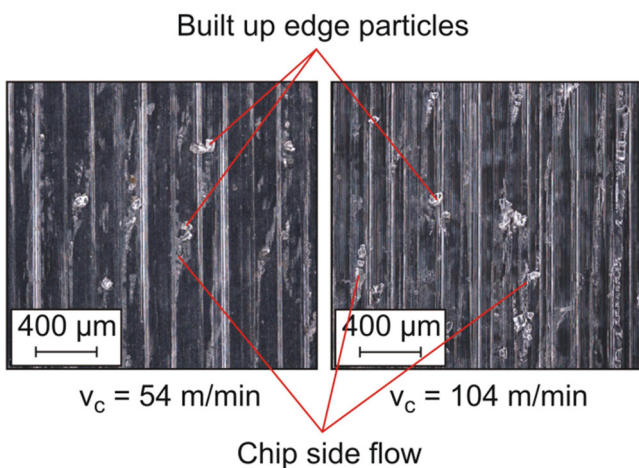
Surface obtained after turning with $f = 0.1 \text{ mm/rev}$, $a_p = 0.5 \text{ mm}$ and different cutting speeds.
